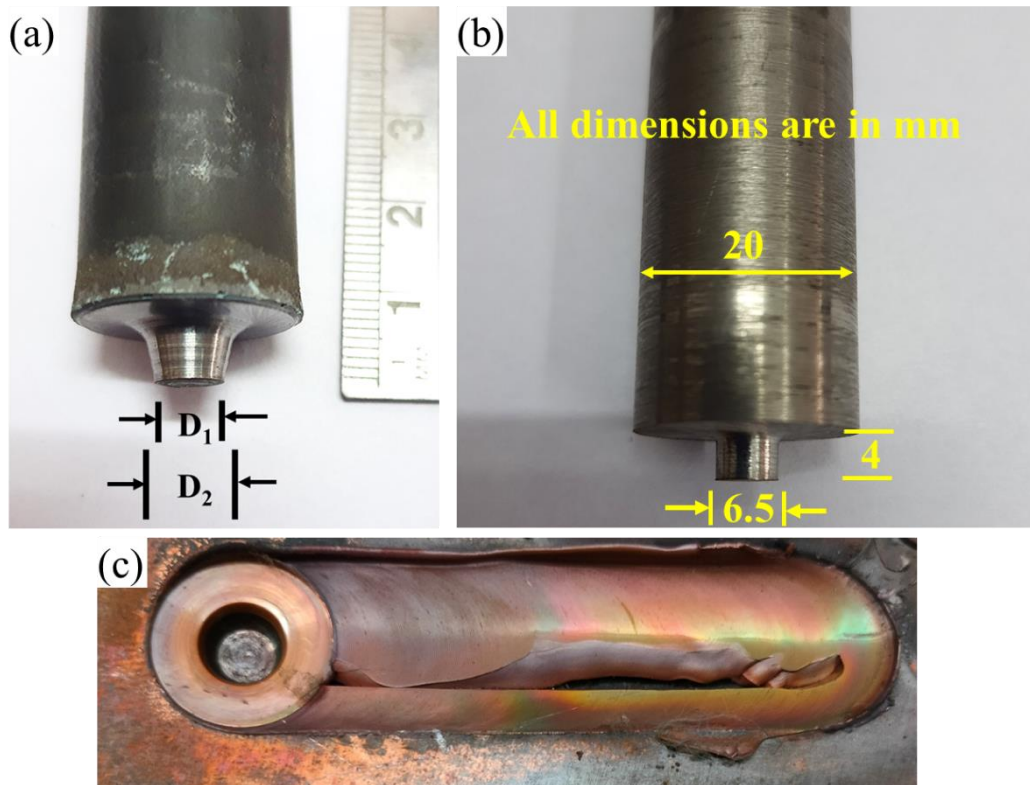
Illustration of (a) tapered tool pin profile depicting different pin diameter D_1 and D_2 (b) used tool profile (c) defect produced in the clad
